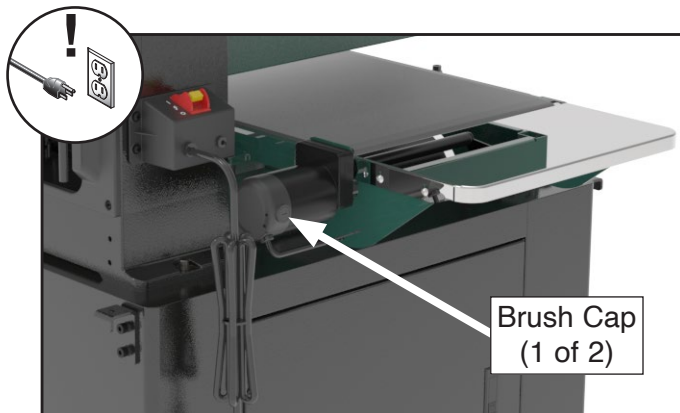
Location of conveyor motor brush cap (G0415 shown).
